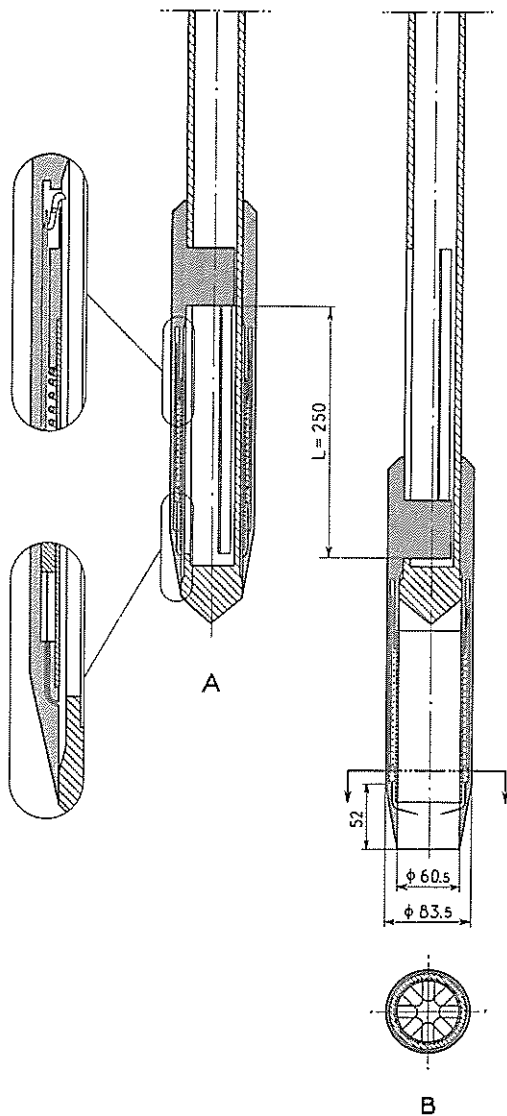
Schematic drawing of early piston sampler with instantaneous shutter.
